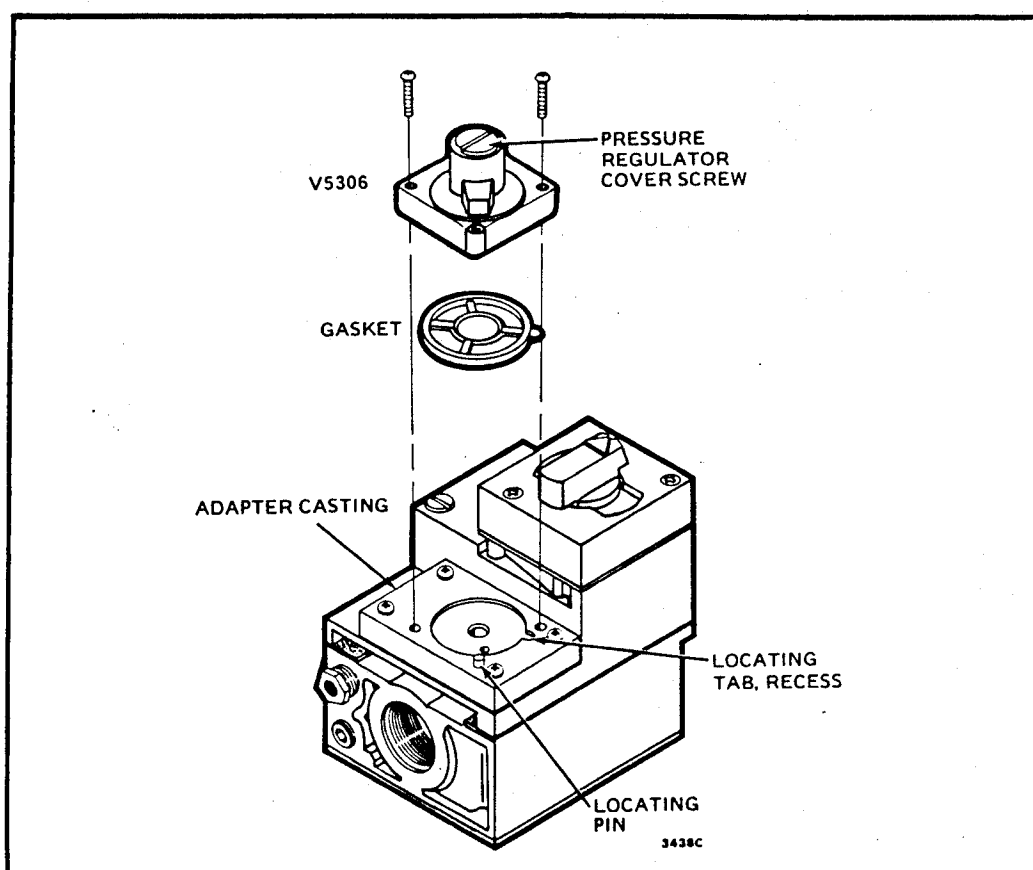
Installing regulators on manual Pilotstat power unit manifold controls with operator adapter casting.
